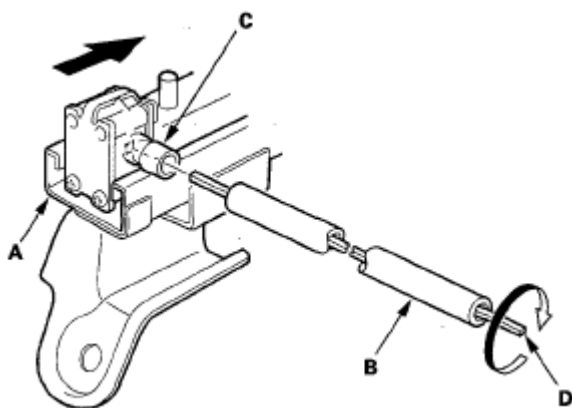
Identifying Slide Joint Cable And Right Slide Gearbox
